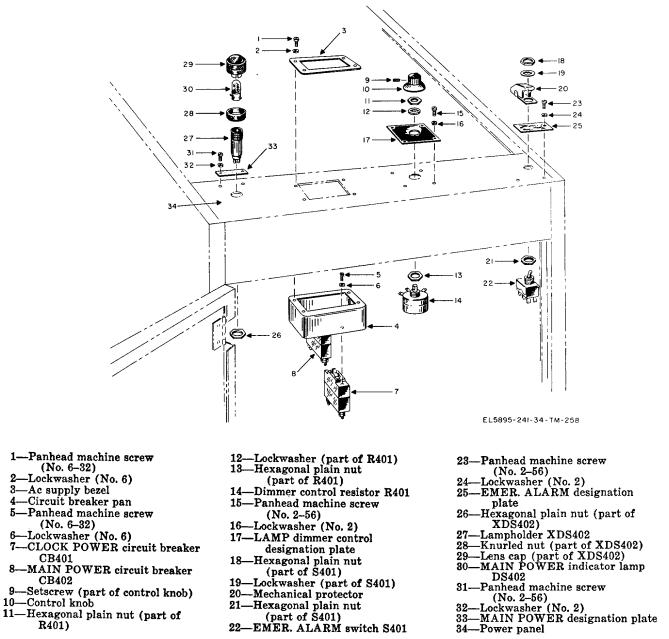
Power control panel (part of OA-2054/FSW-8), removal of components.
